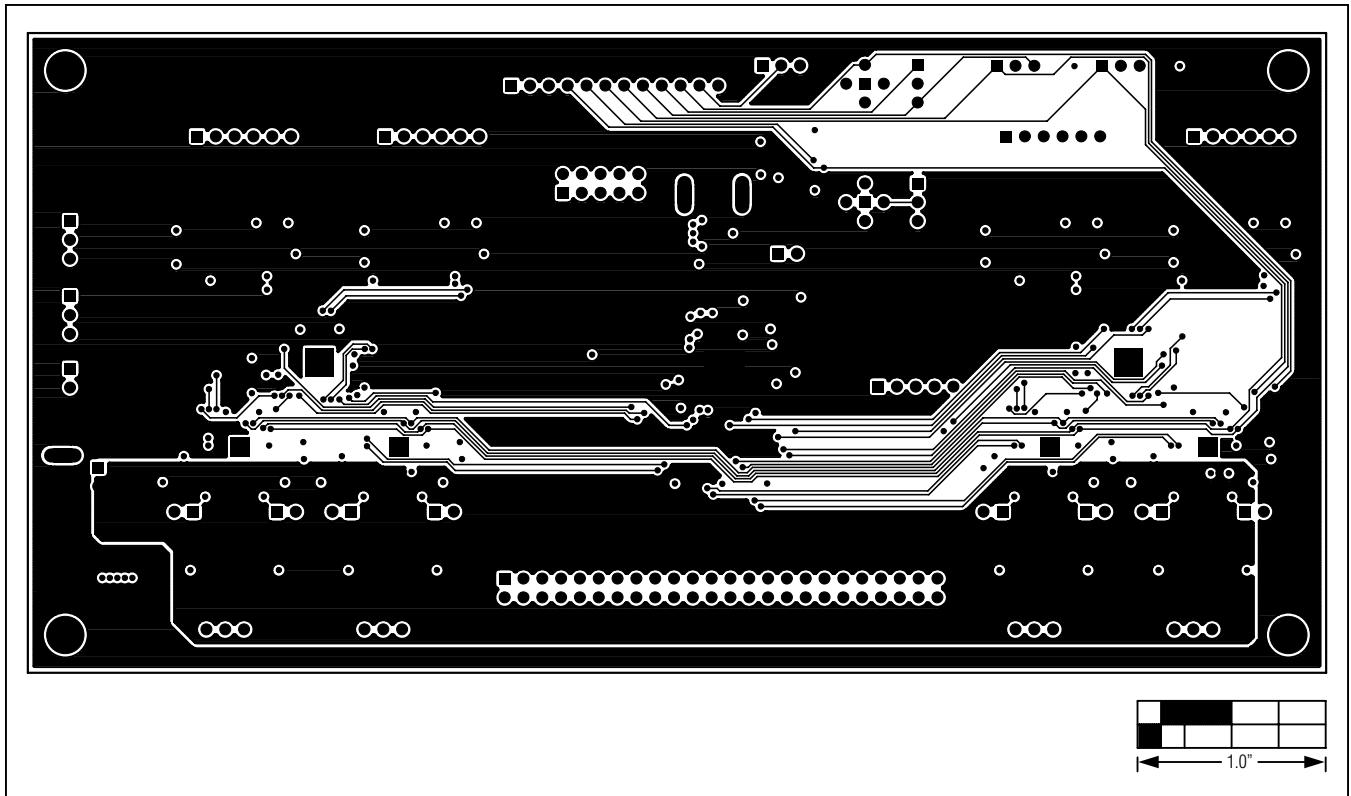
MAX14830 EV Kit PCB Layout—Solder Side
